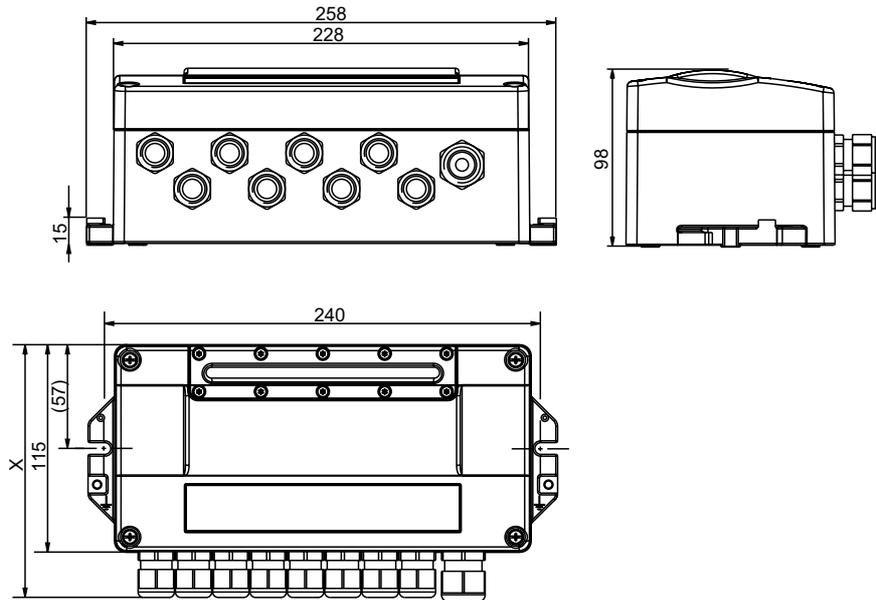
F2D0-MIO* All dimensions in mm without tolerance indication.
